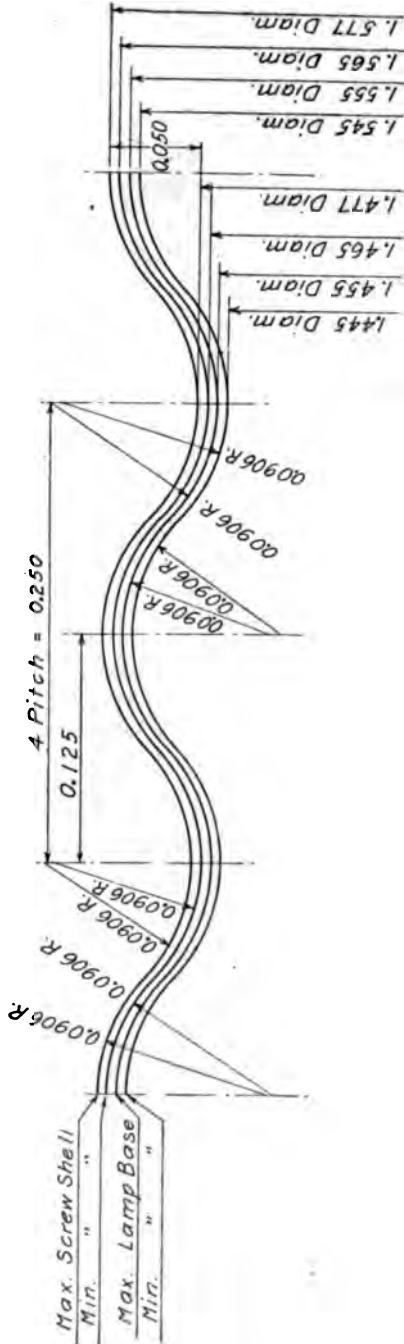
FORM AND DIMENSIONS OF THREADS FOR LAMP BASE AND SOCKET SCREW SHELLS, MOGUL SIZE
